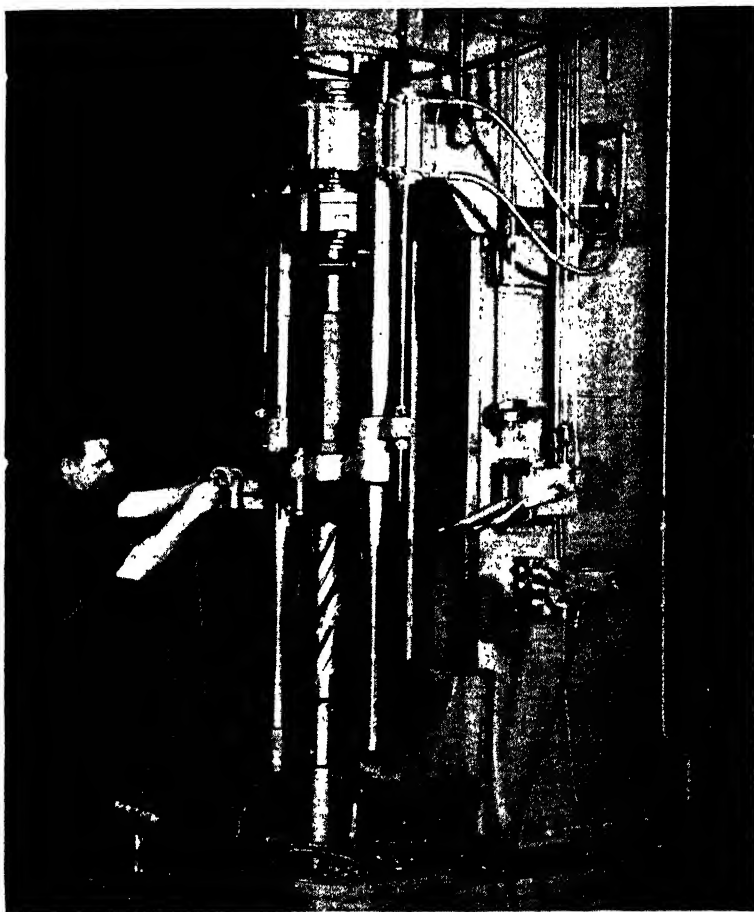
Drilling with Traveling Drill Head Mounted on Jig Tracks
